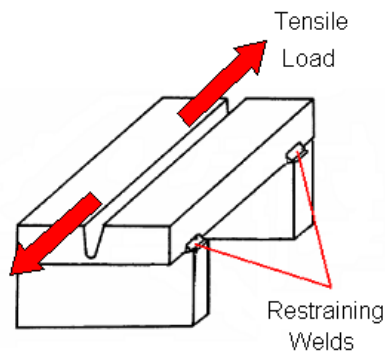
The Longitudinal Bead Tensile Restraint Cracking Test requires the deposition of a single weld bead into a groove, after which a tensile load is induced.
